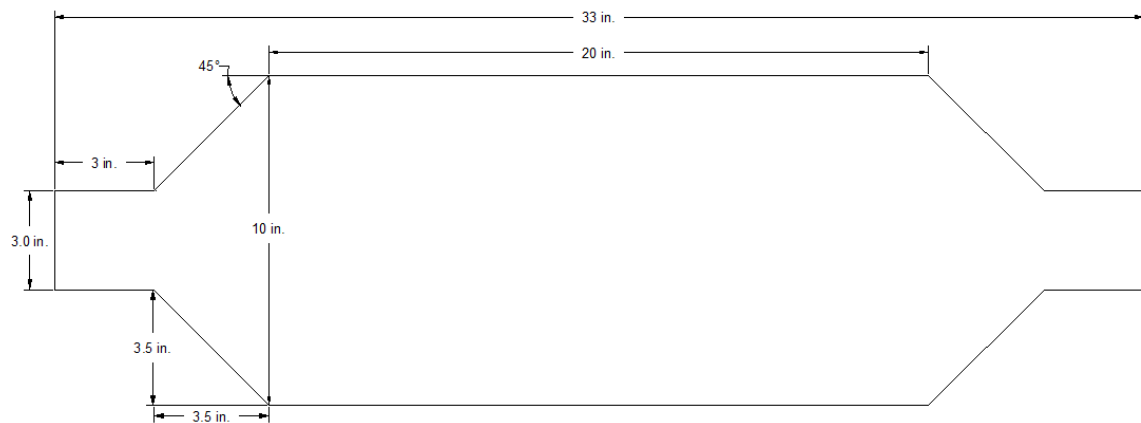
Final dimensions for axially loaded plates tested in UTM
